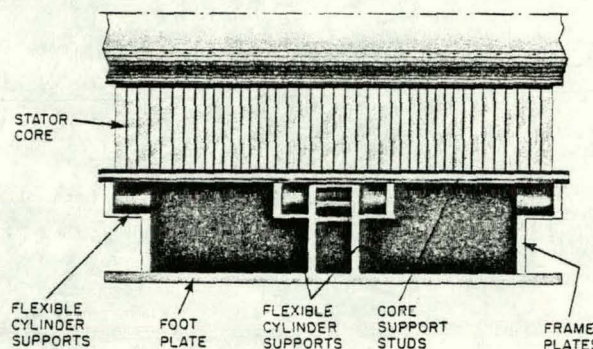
Side view of stator frame with thin cylinder flexible core mounting.
